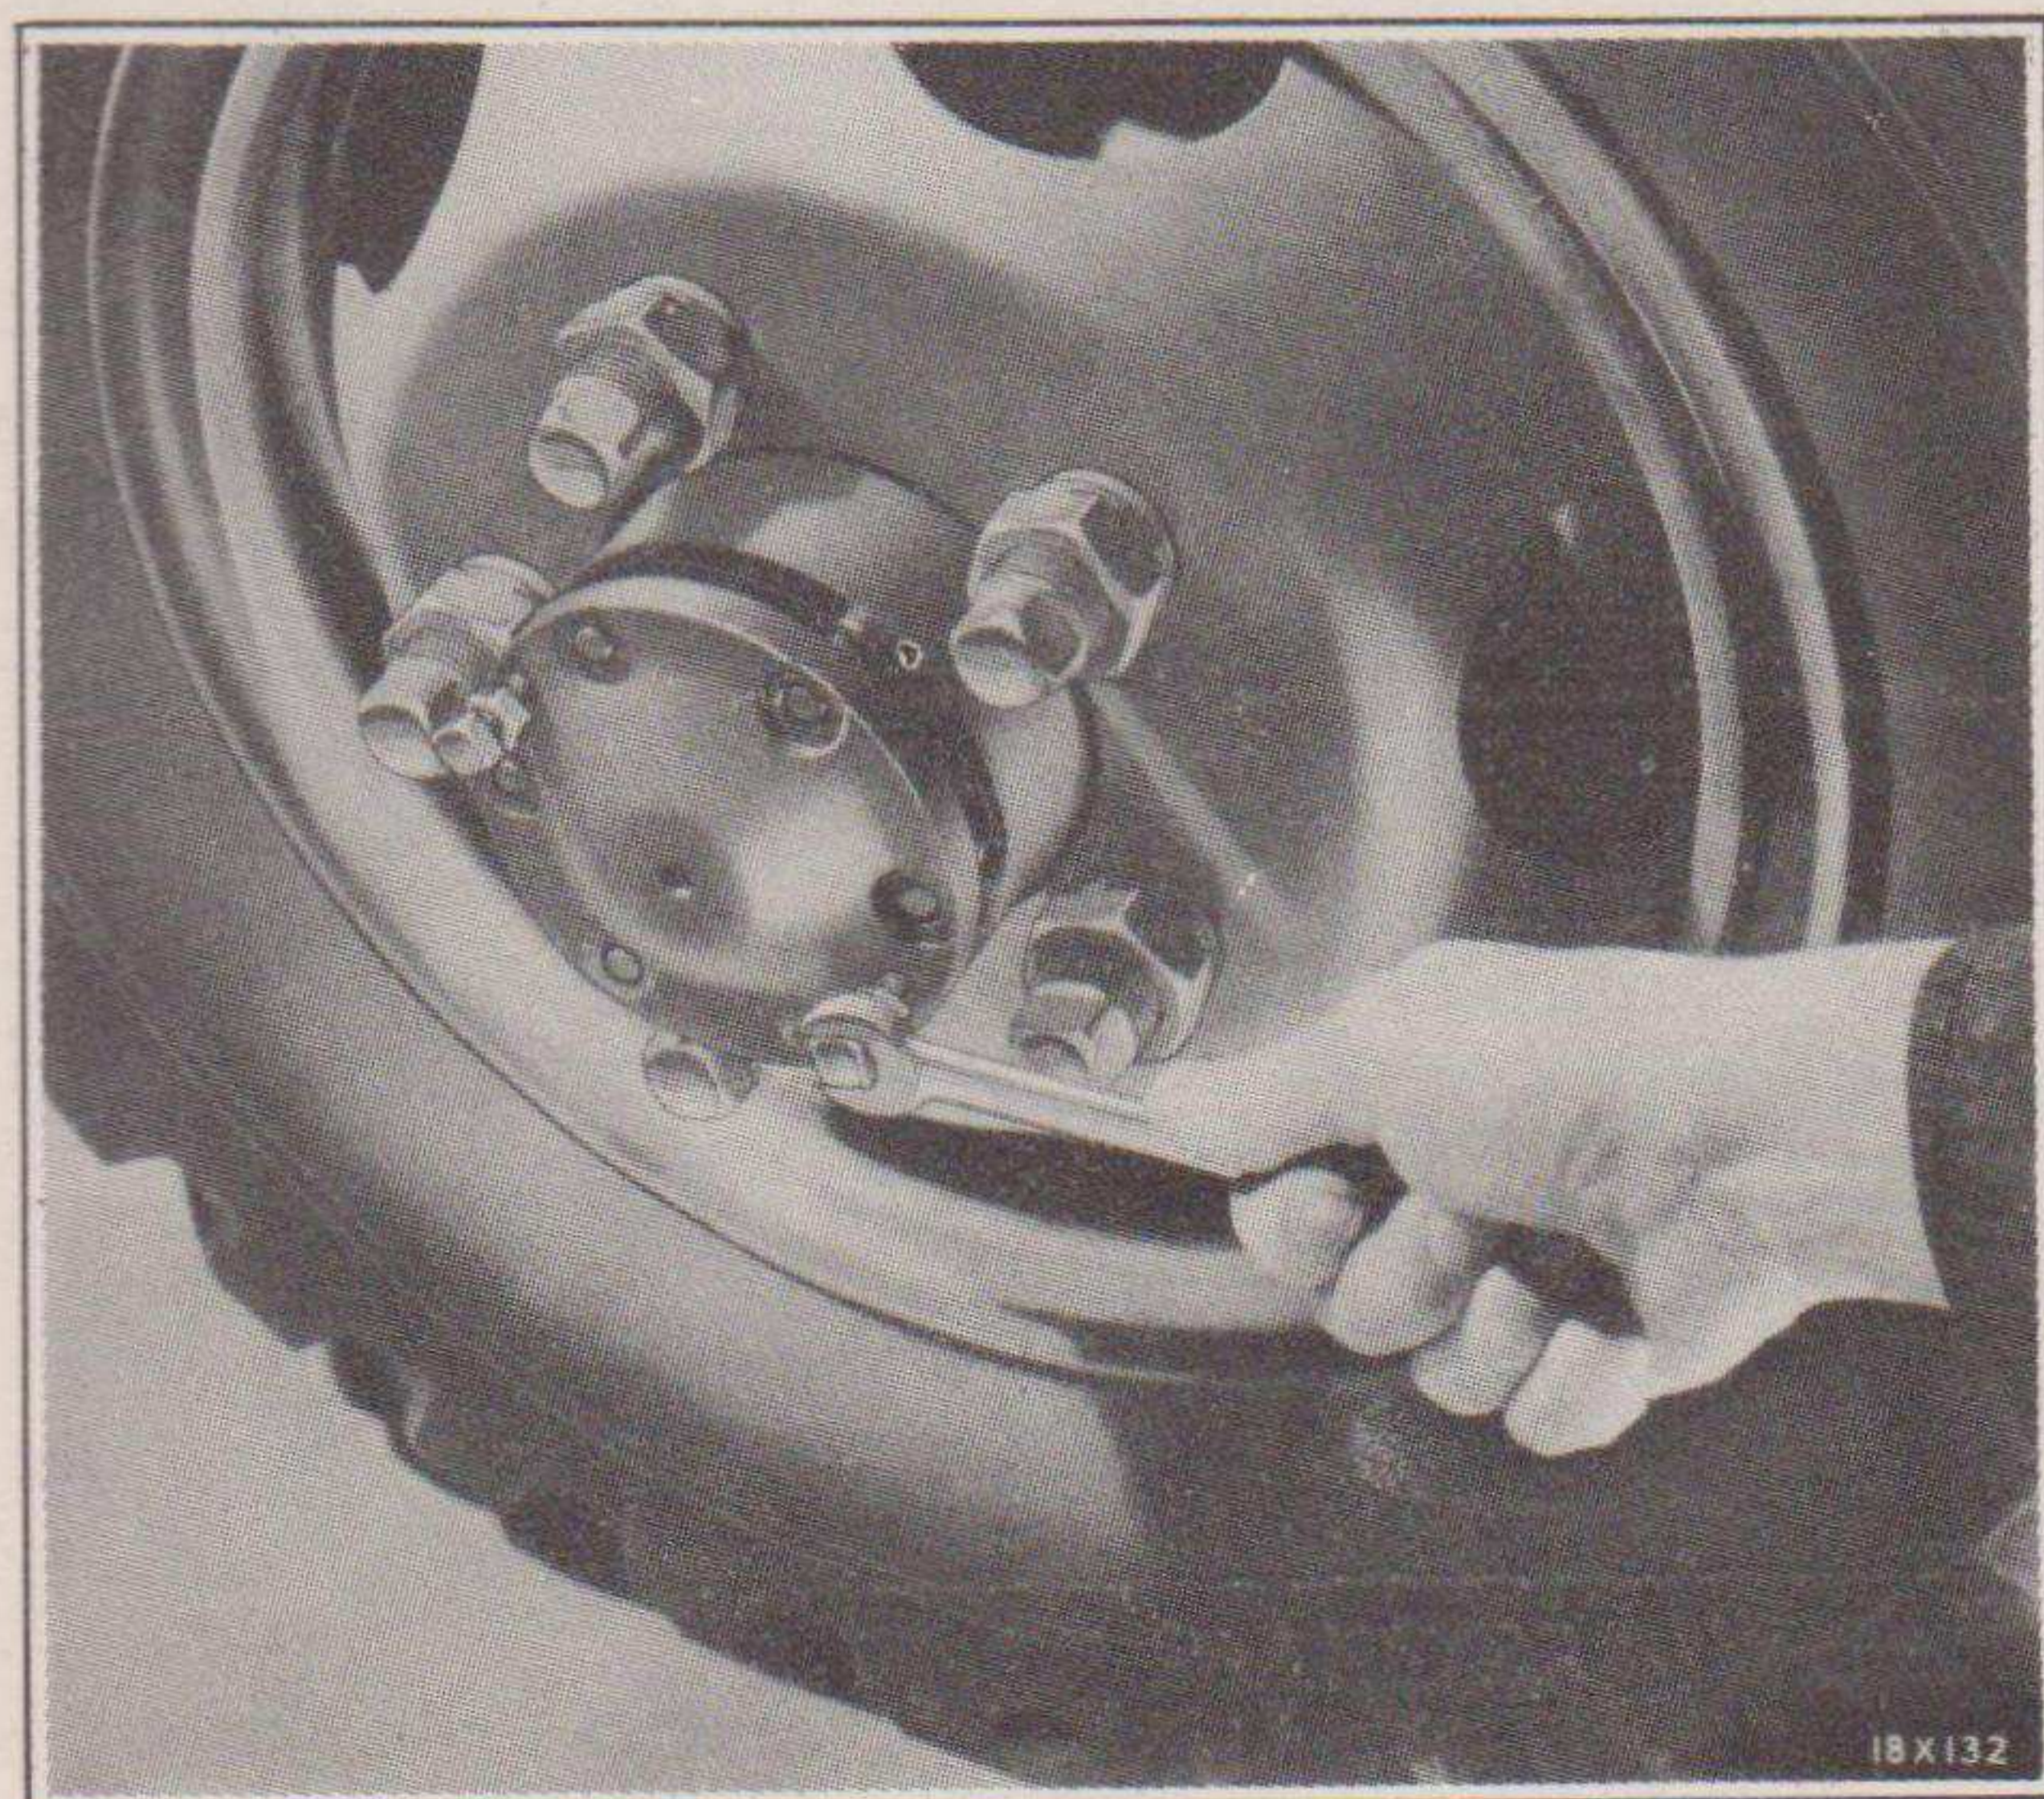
Removing Rear Axle Drive Shaft with Puller Screws
